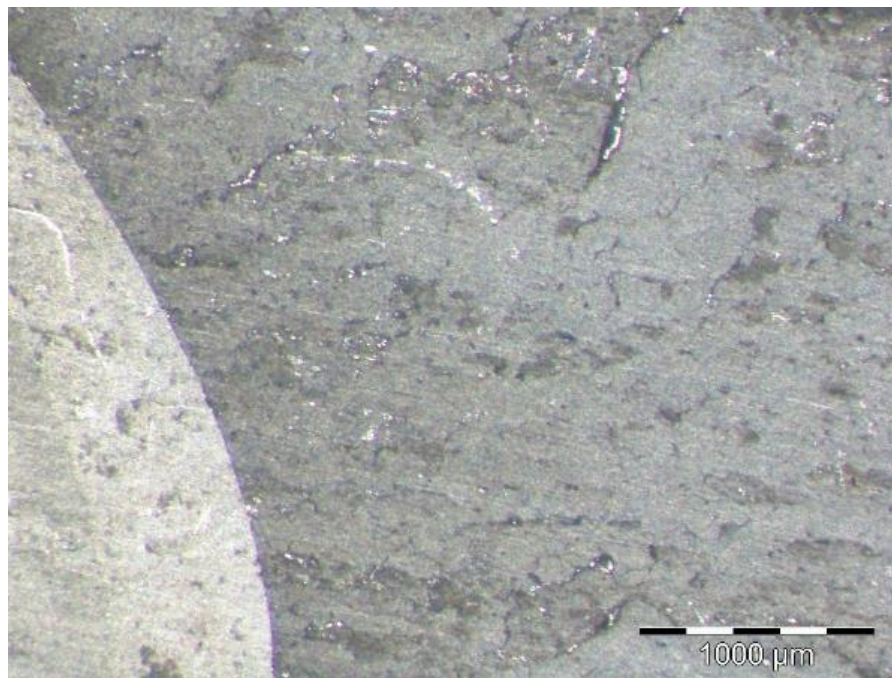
Stereo microscope image of crack surface after fracture testing for test temperature 25°C.
